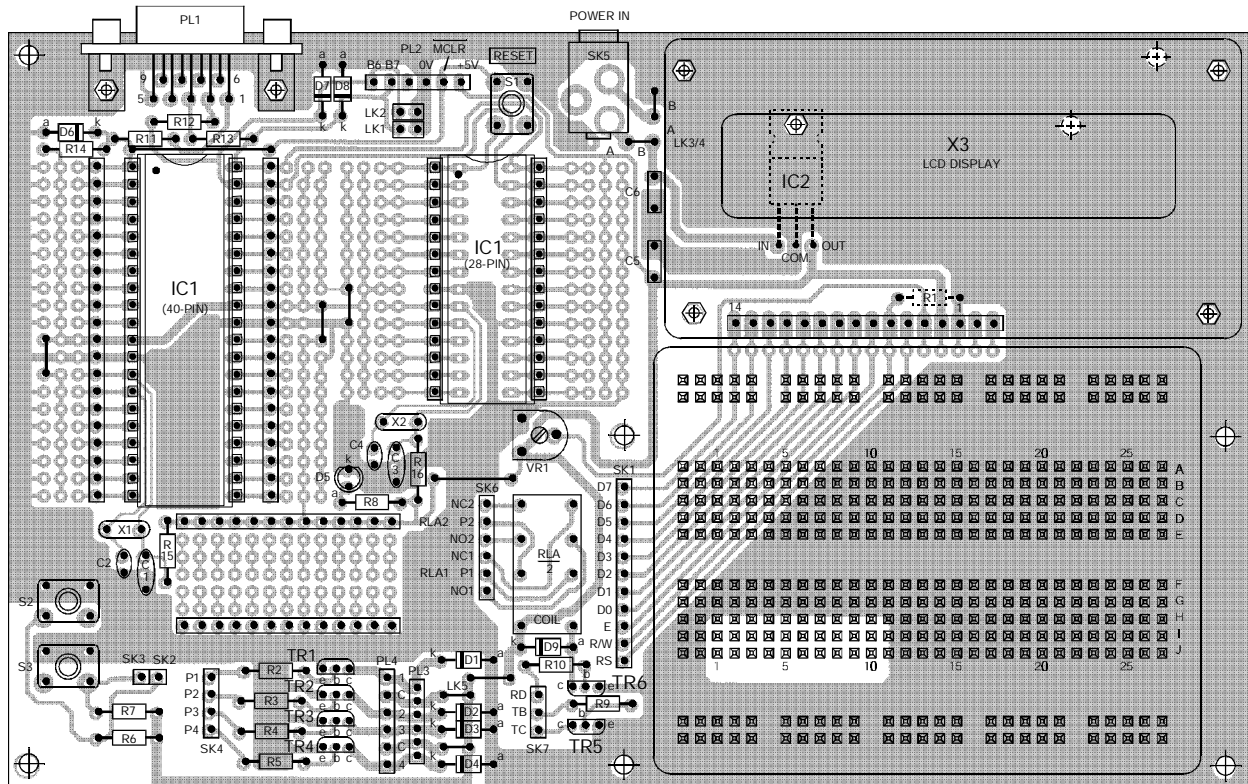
Printed circuit board component layout and (approximately) full-size copper foil master pattern.
